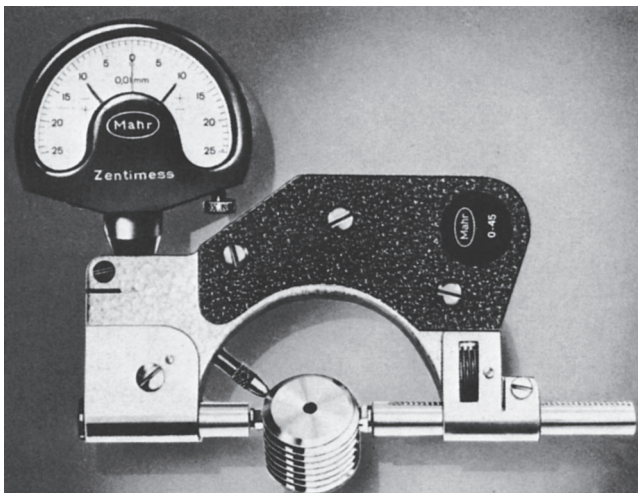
Dial-indicating thread snap gage (Courtesy Mahr Federal Inc.).
